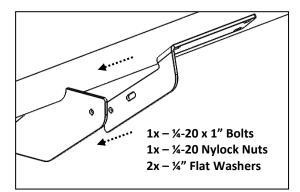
TREADPLATE NERF BARS ONLY Bolt-on center bracket for treadplate step.
